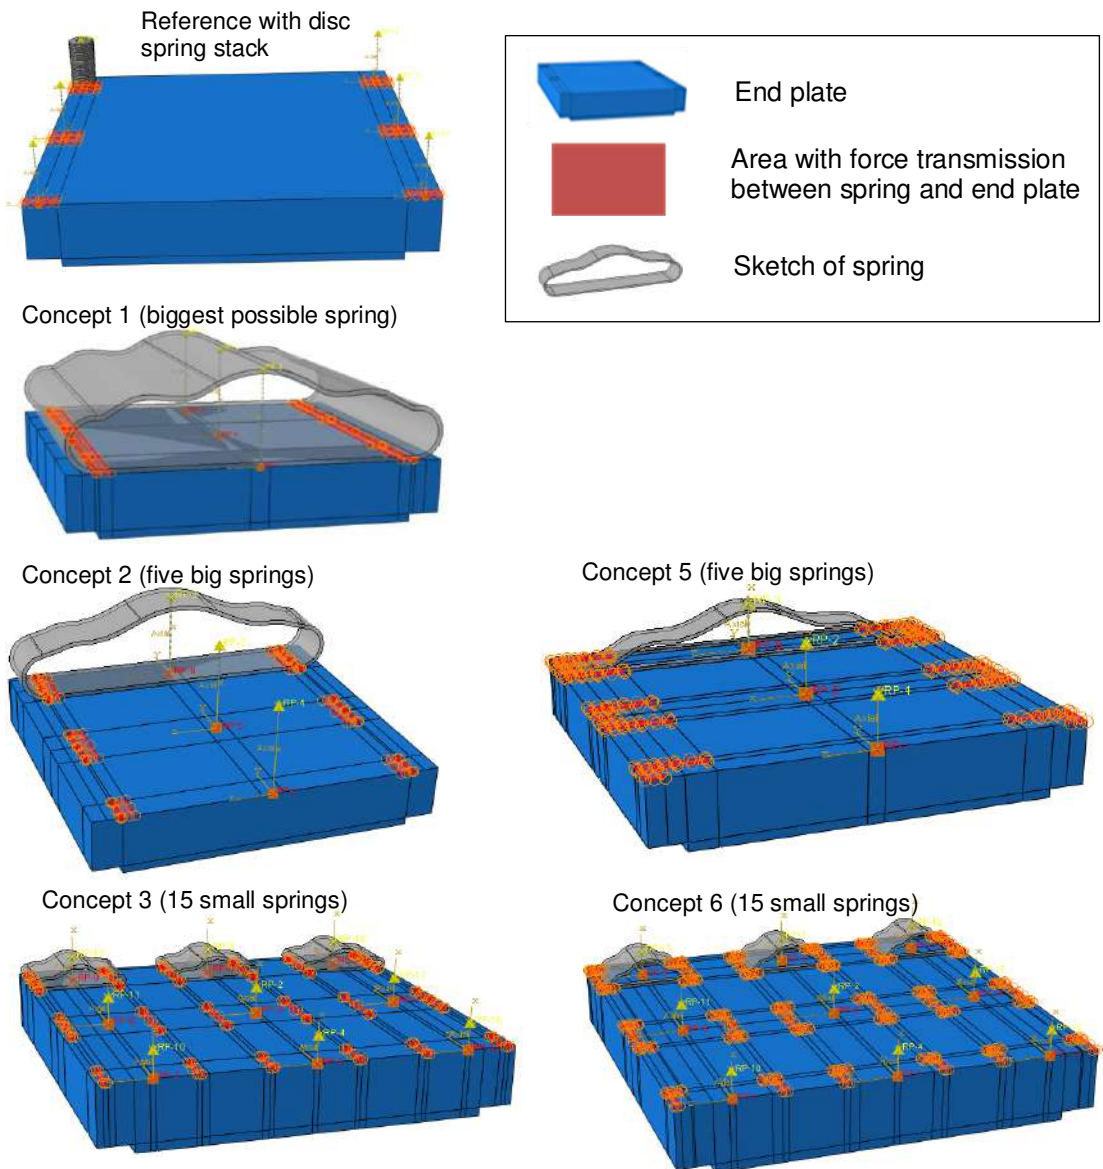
Connection between spring concept and end plate with indicated spring sketch
